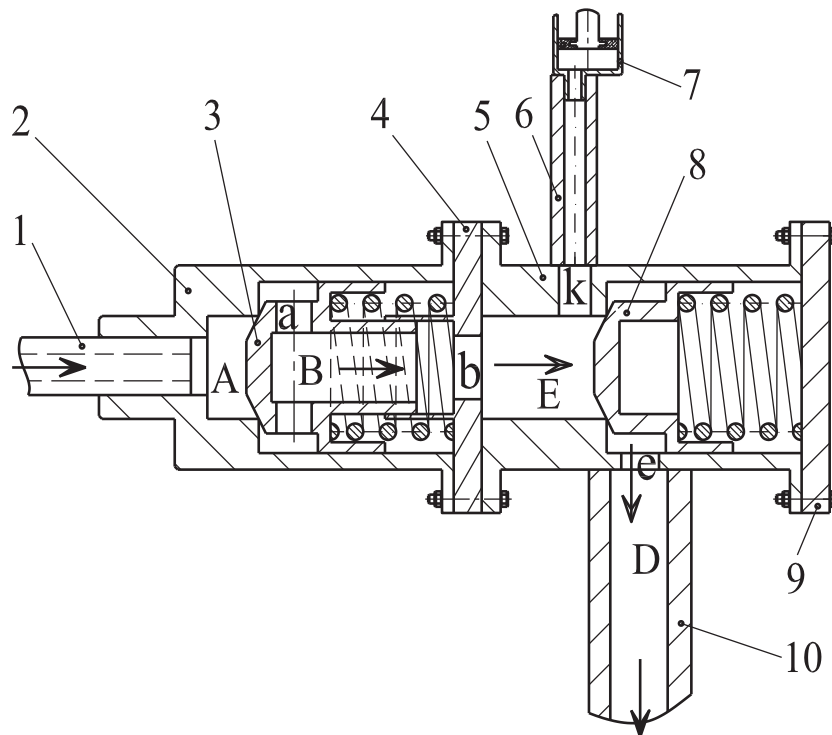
New extracting device for chyme. 1. intake pipe, 2. left valve sleeve, 3. intake valve core, 4. left valve cover, 5. right valve sleeve, 6. connecting tube, 7. syringe, 8. drain valve core, 9. right valve cover, 10. drainpipe.
